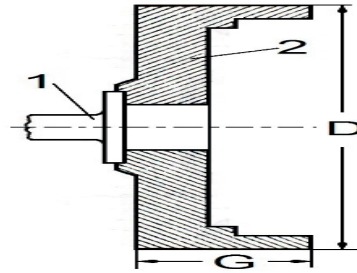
1 - crankshaft; 2 - flywheel; D - flywheel diameter; G - Generator (thickness)
